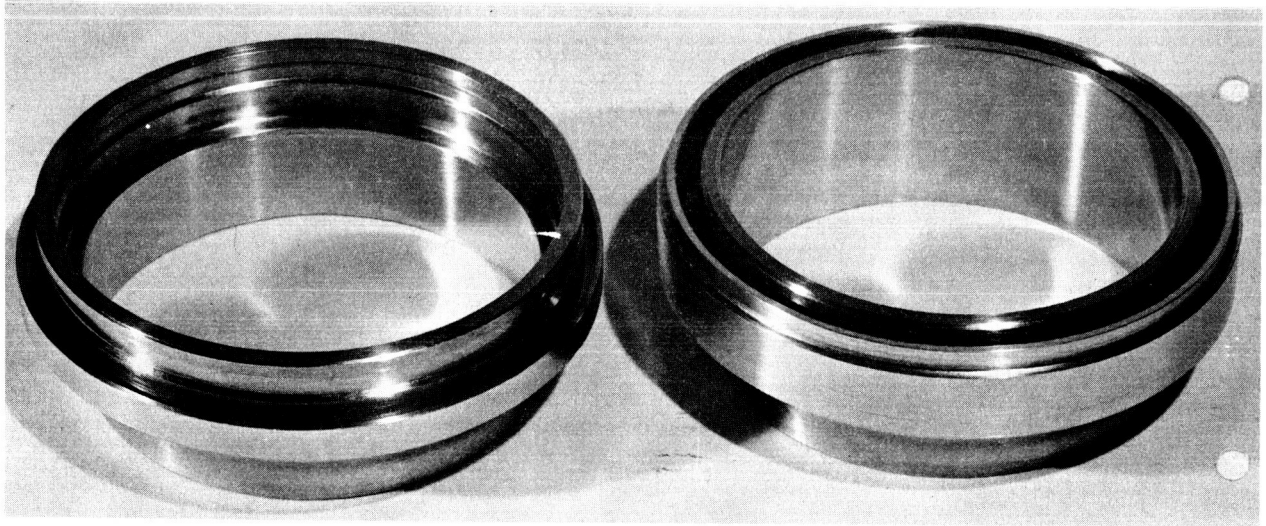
EXPERIMENTAL BOLTLESS FLANGE
